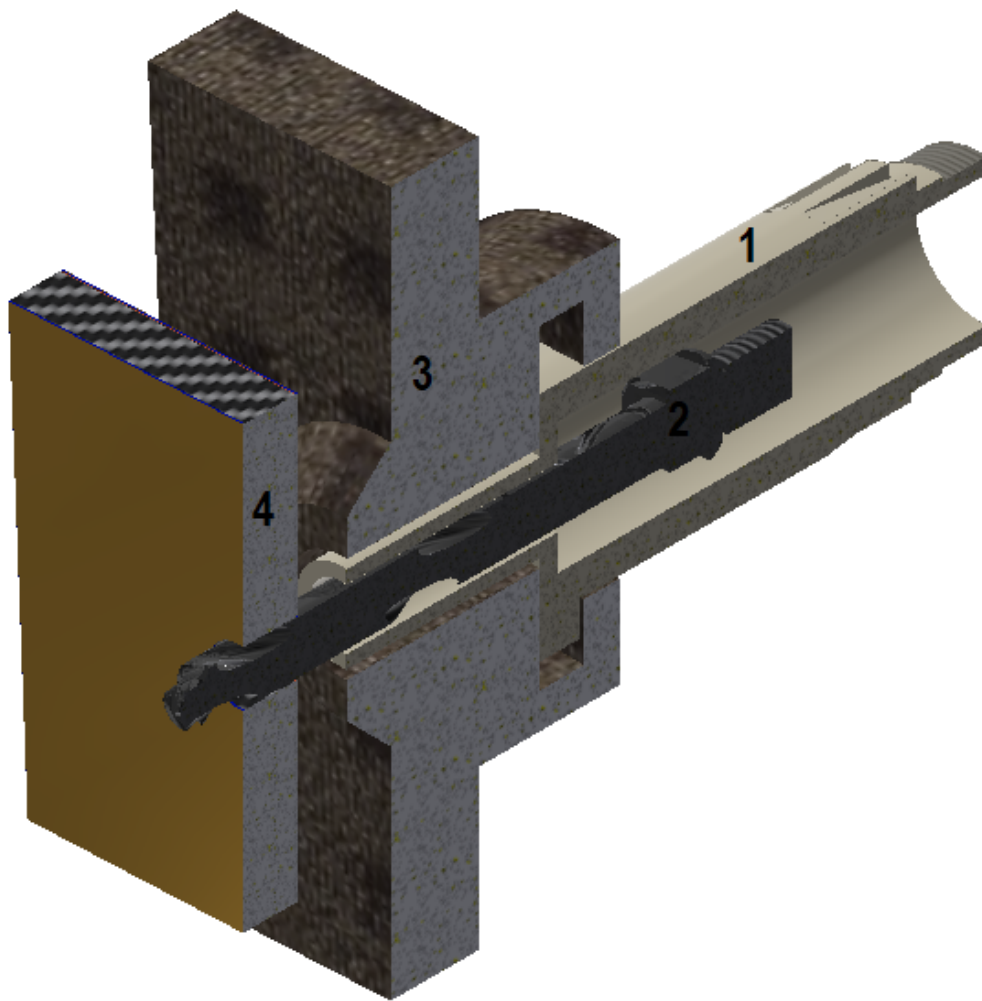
Representative cut view of bayonet, drill tool, drilling template and product.
